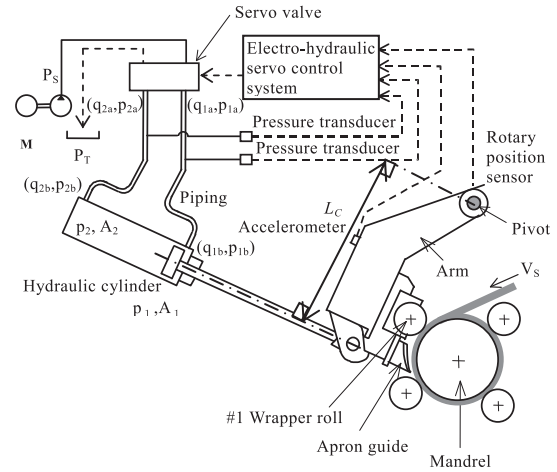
Hydraulic wrapper roll in hot strip downcoiler
